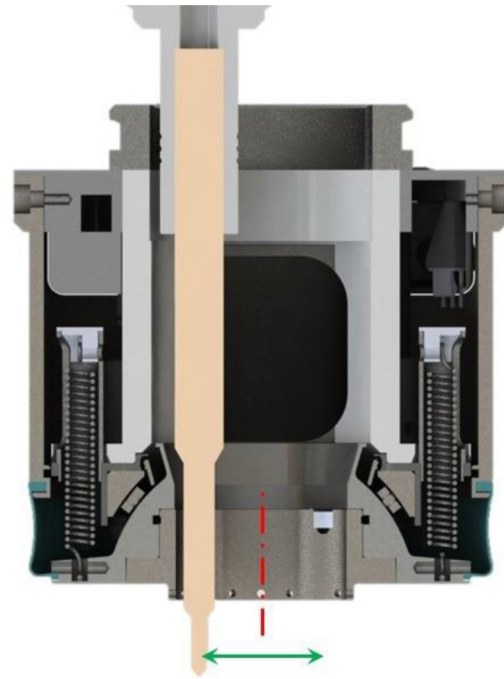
Cross-section of nut plate nose piece allowing internal shuttling of the cutting tool
